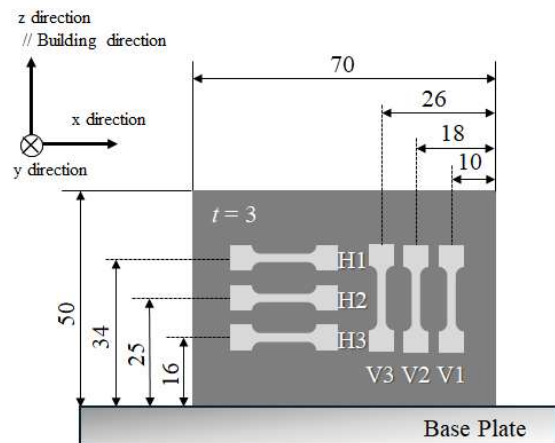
Cutting position and size of tensile specimens. V1, V2 and V3 specimens are vertical to the base plate, whereas that of H1, H2 and H3 specimens are
